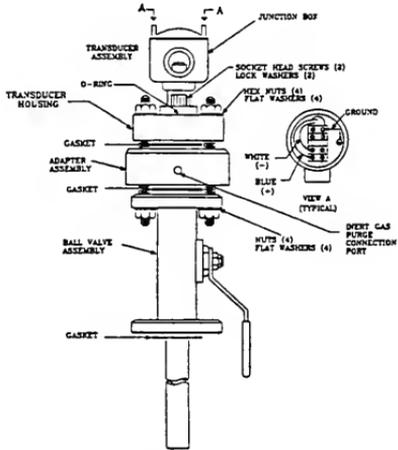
LEFT-MID TRANSDUCER ASSEMBLY DETAILS.
